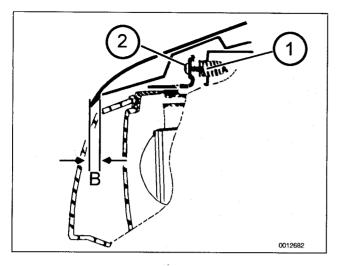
Measure gap B (1.5 mm) between front of hood and headlight cover. Note horizontal headlight adjusting nut (1) and retaining screw (2).
